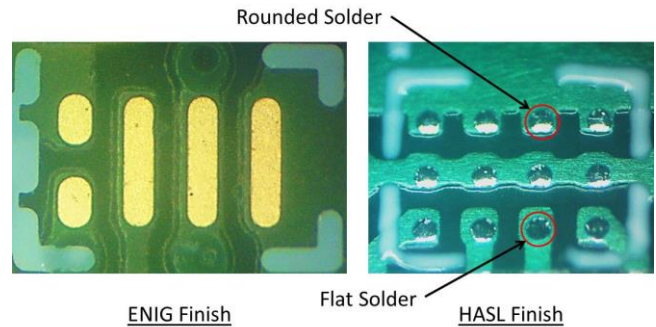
ENIG finish versus HASL finish showing uneven solder heights.
